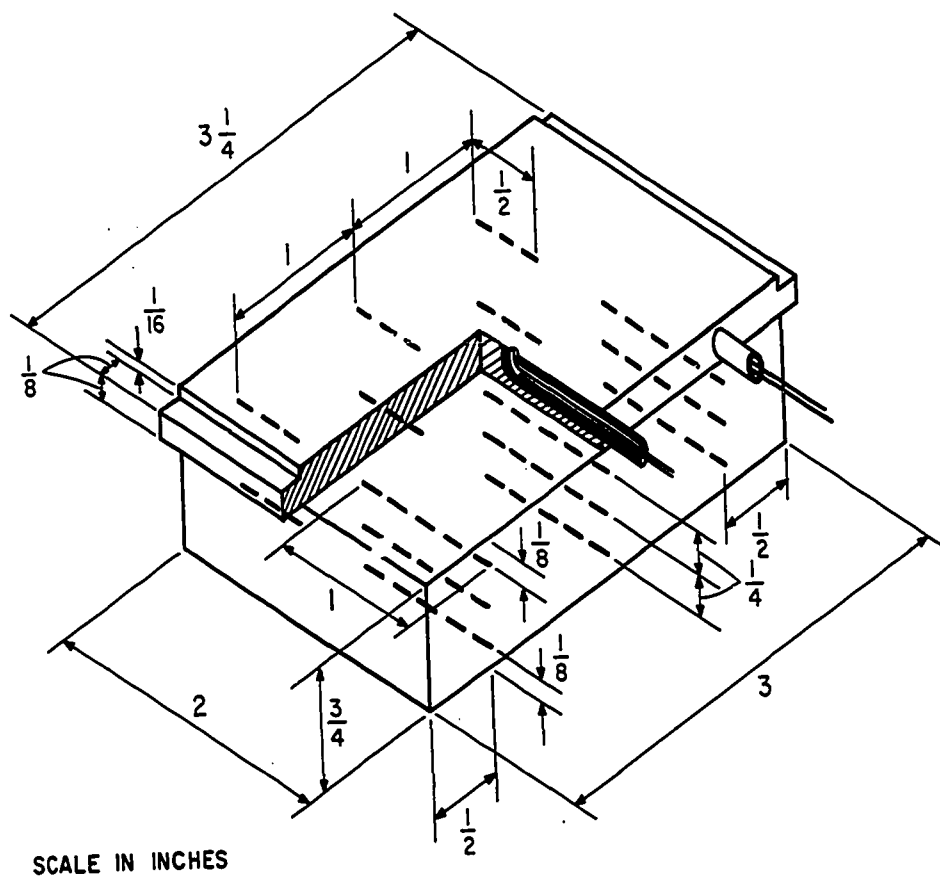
Conduction Block and Heat Transfer Surface Assemblage with Installed Thermocouples
